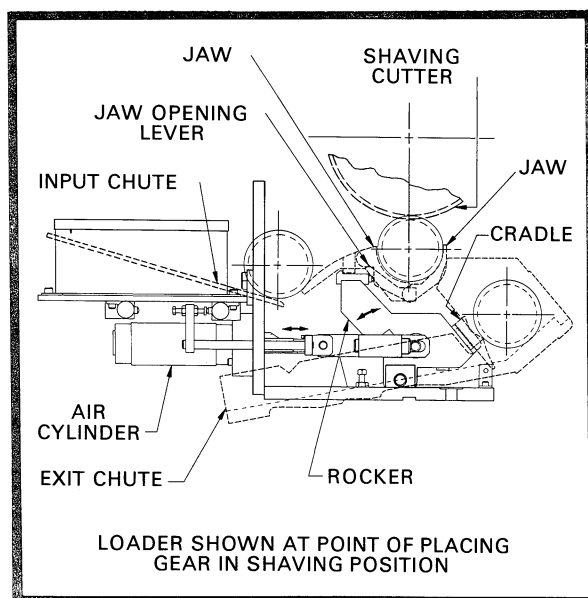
Basic type of rocker-type automatic loader for rotary gear shavers.
